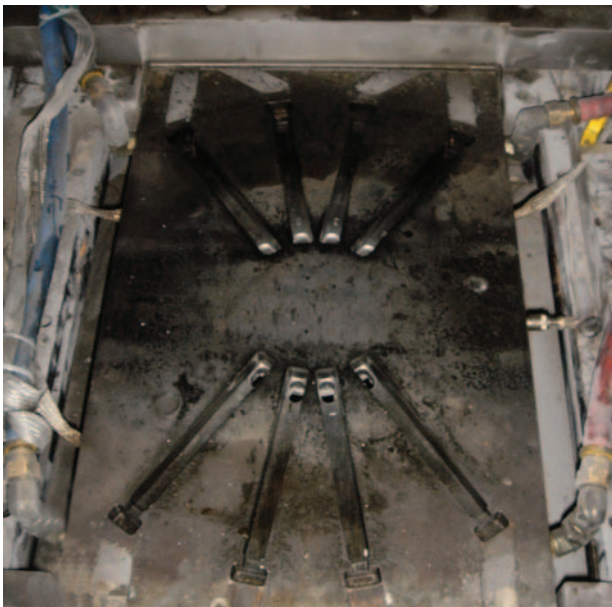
Photo of the tool (an 8-cavity rectangular bar die) and actual casting with gate posts and ingates.
